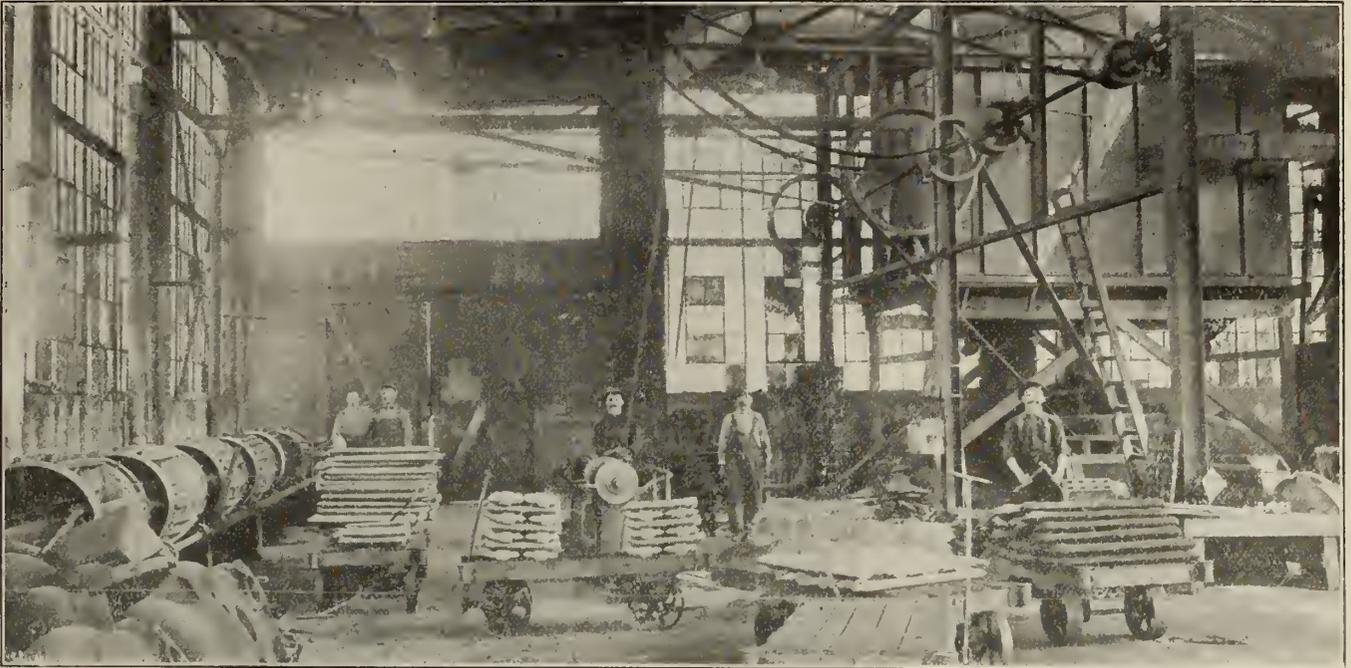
GENERAL VIEW OF FETTLING SHOP.
